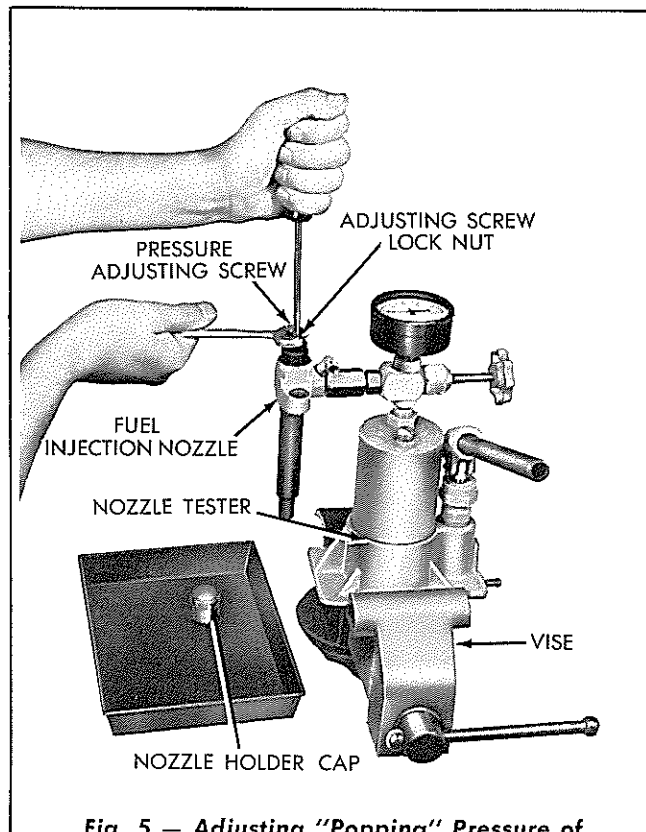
Adjusting "Popping" Pressure of Fuel Injection Nozzle
